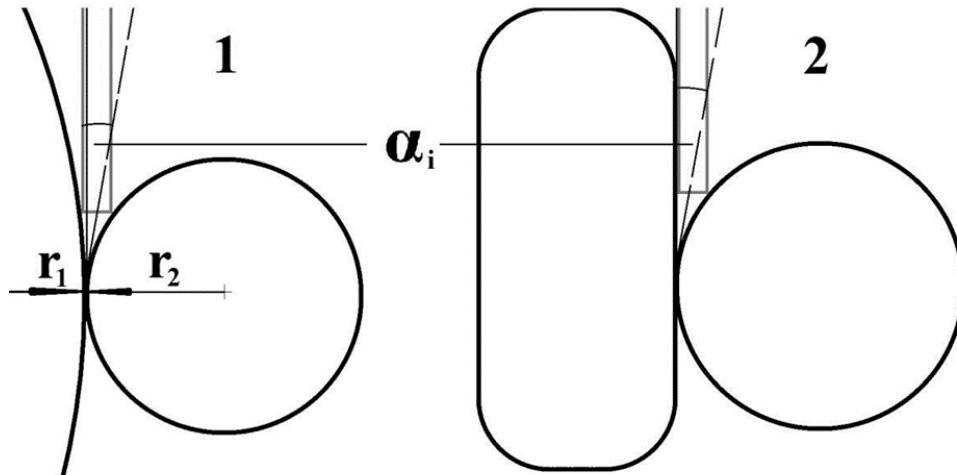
Process control in laser beam welding of capillary tubes with (1) large diameter differences or (2) non-circular profiles using a tilting angle  $\alpha_i$  compared to the welding position PA (flat position)
